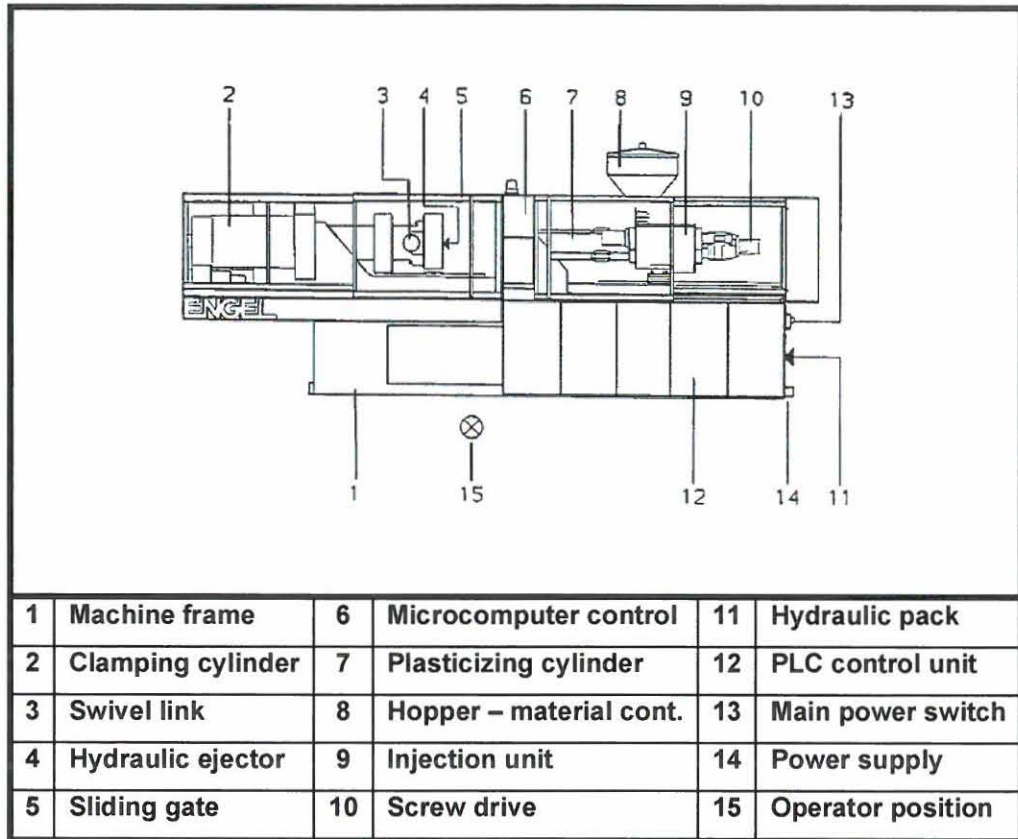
Schematic of Engel 80 Ton Tie-bar-less Injection Moulding Machine
